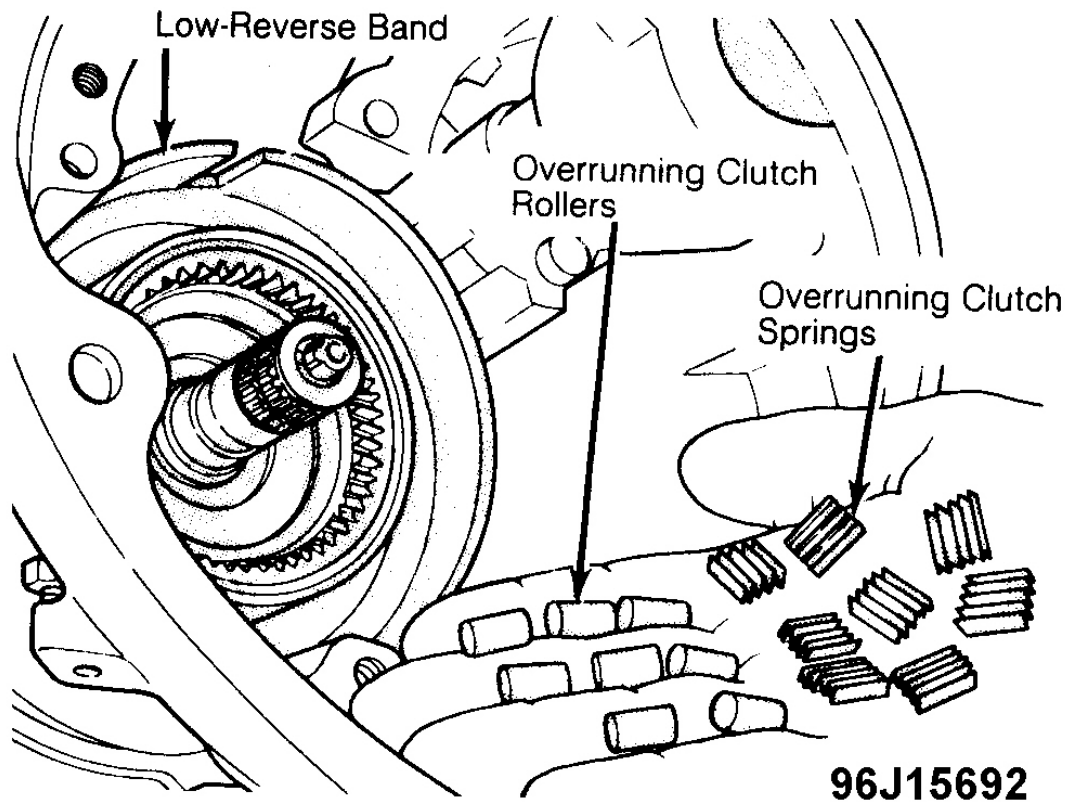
Removing Overrunning Clutch Springs & Rollers
